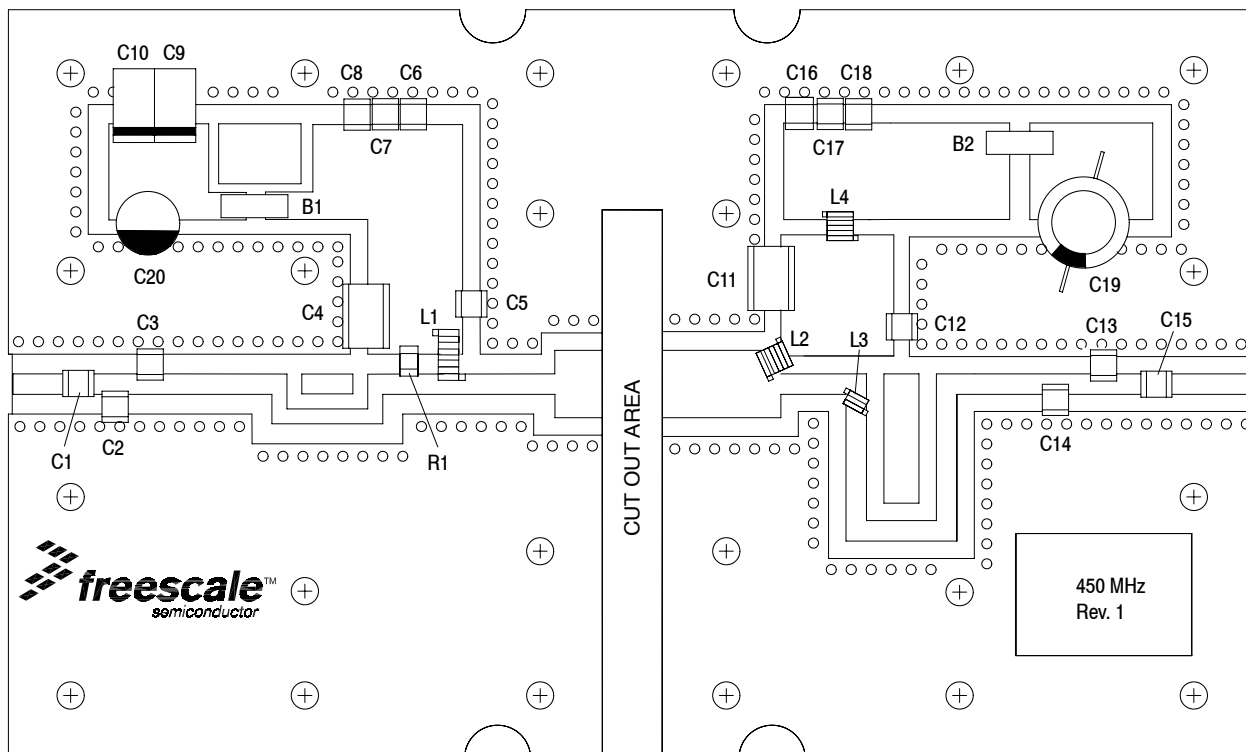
MRF6V2010NR1(NBR1) Test Circuit Component Layout — 450 MHz
